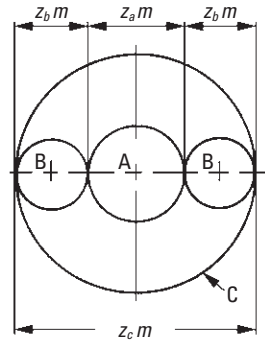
(a) Condition No. 1 of Planetary Gear System
